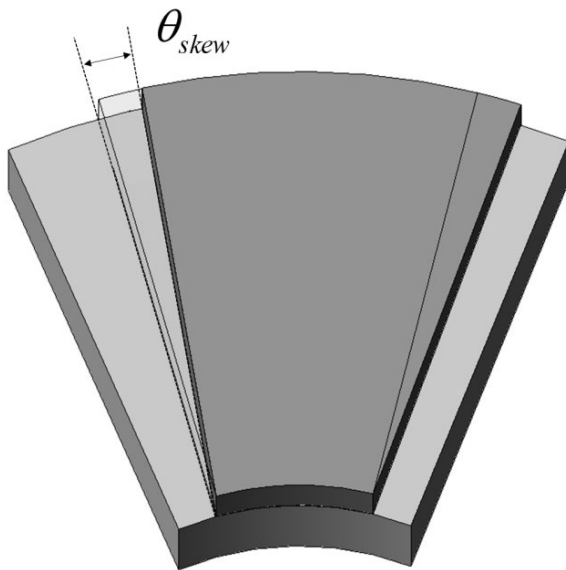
Magnet skewing of the AFPM machine rotor.
